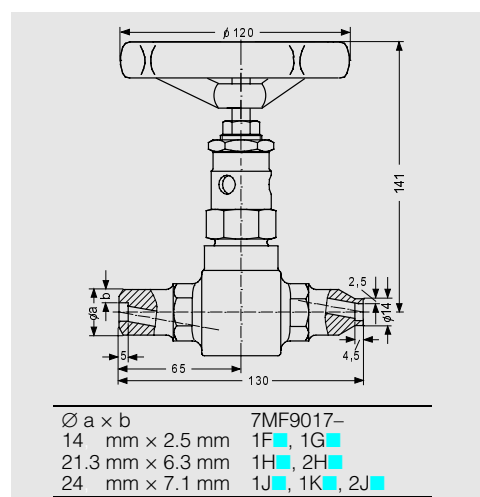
/113 Shut-off valves 7MF9017-, dimensions
